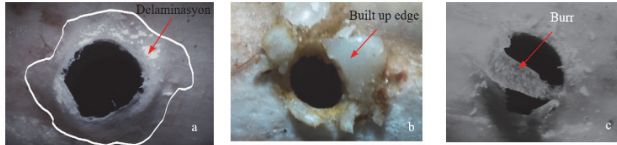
Types of damage at the hole exit: (a) Delamination; (b) Built up edge, (c) Burr formation
